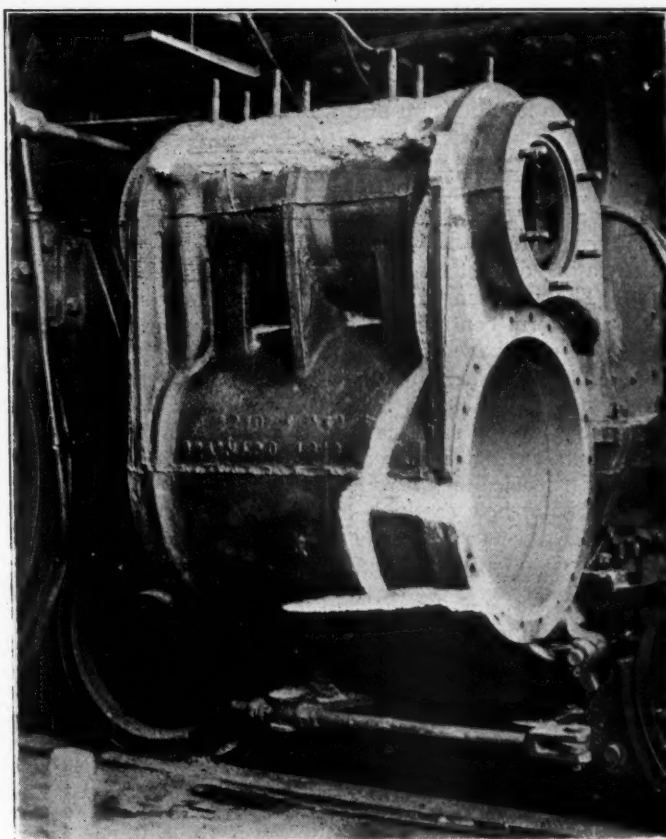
Locomotive Cylinder Oxyacetylene Welded
